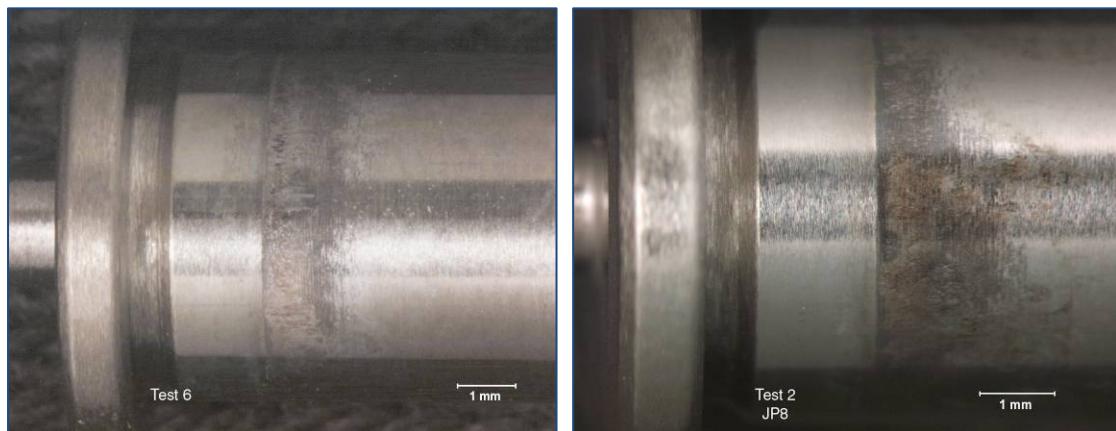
AF-8029 JP-8 (HT Left), Lower Hydraulic Coupler Piston, Wear Scar Close-up, JP-8 (Base Right)
